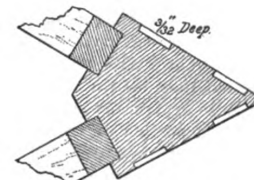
Section of Leg on Line A.—Scale, 1 1/2 Inches to the Foot.
